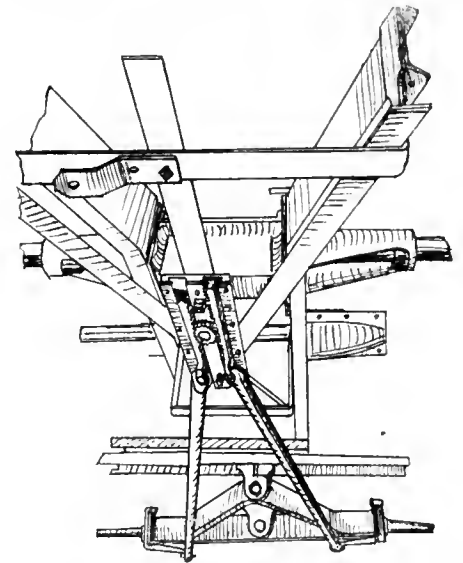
ARRANGEMENT OF STEERING GEAR.
